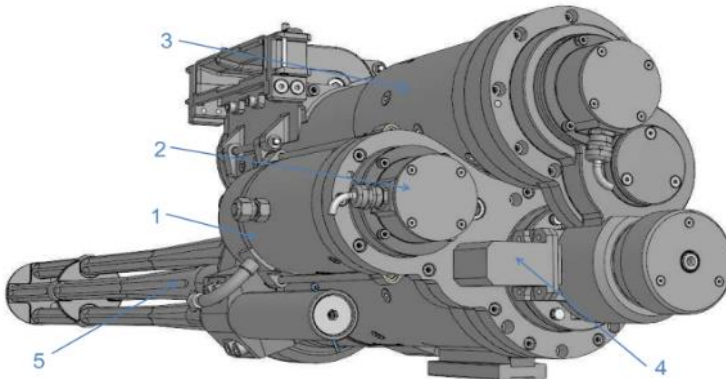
WLKM multi-barrel rotary machine gun (source: ZM Tarnów)
